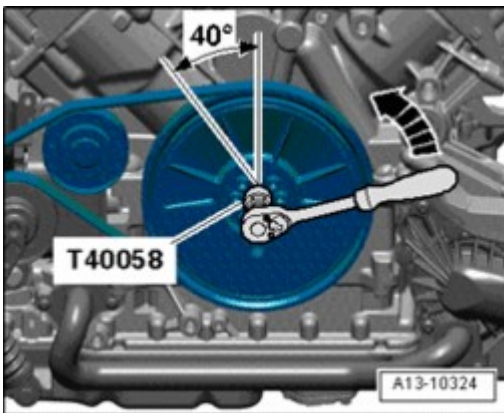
Rotating Crankshaft With Socket T40058 Opposite Engine Rotation Direction 40 ° Out Of "TDC" Position
